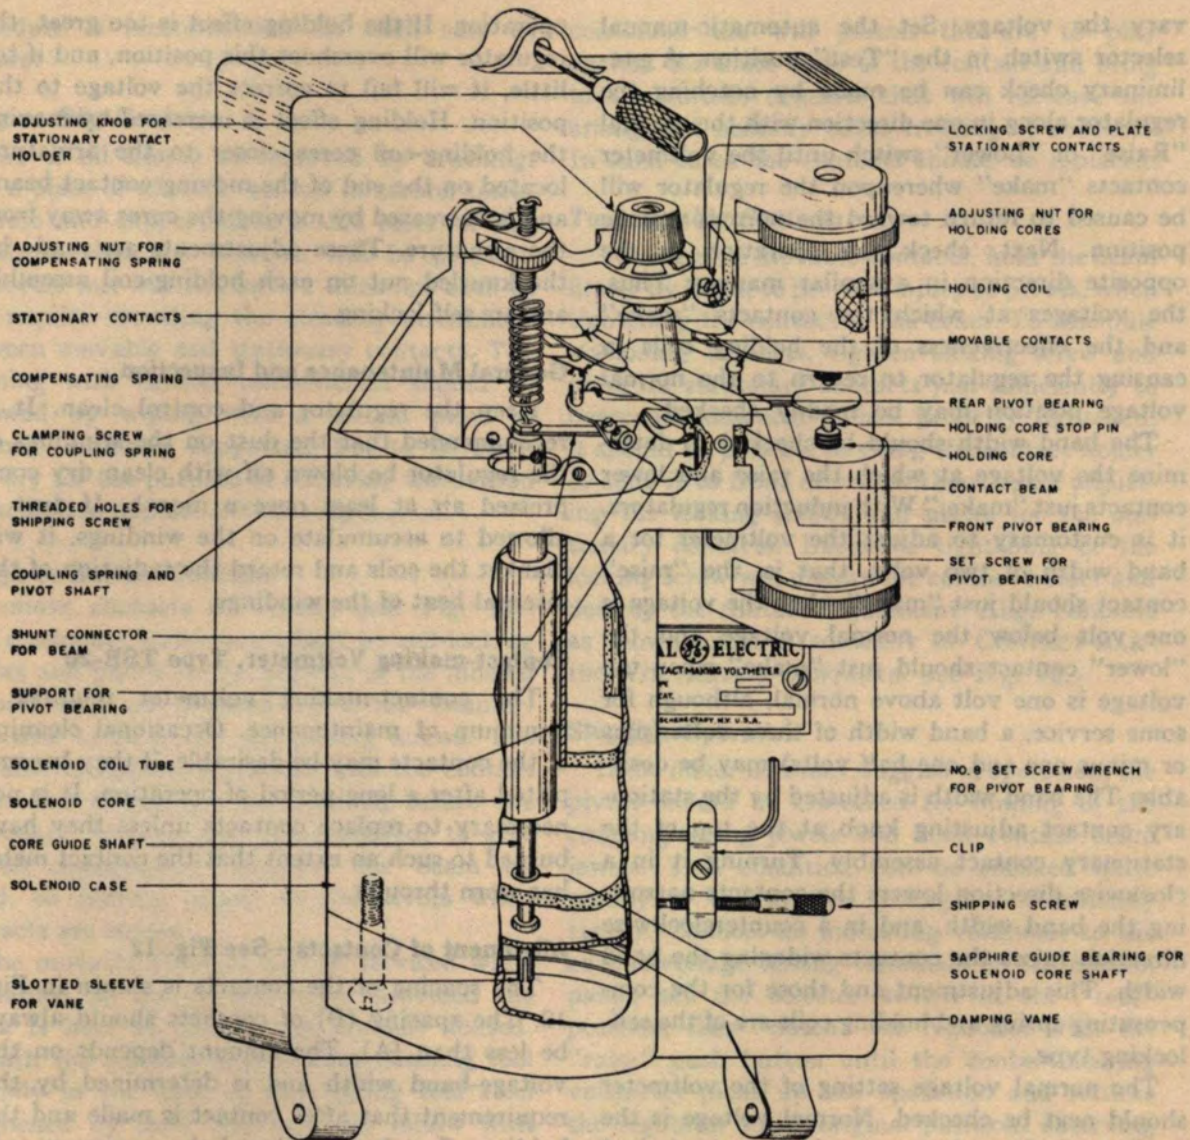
Sectionalized view of Type TSB-20 contact-making voltmeter
